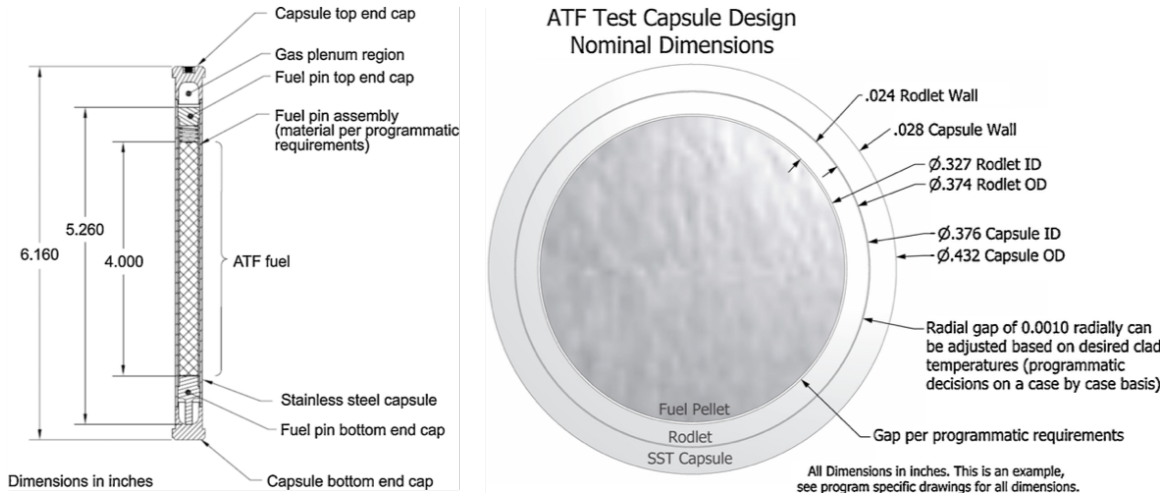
ATF-1 test capsule assembly (left) and capsule cross-section (right). Images reproduced from Barrett et al. [80].
